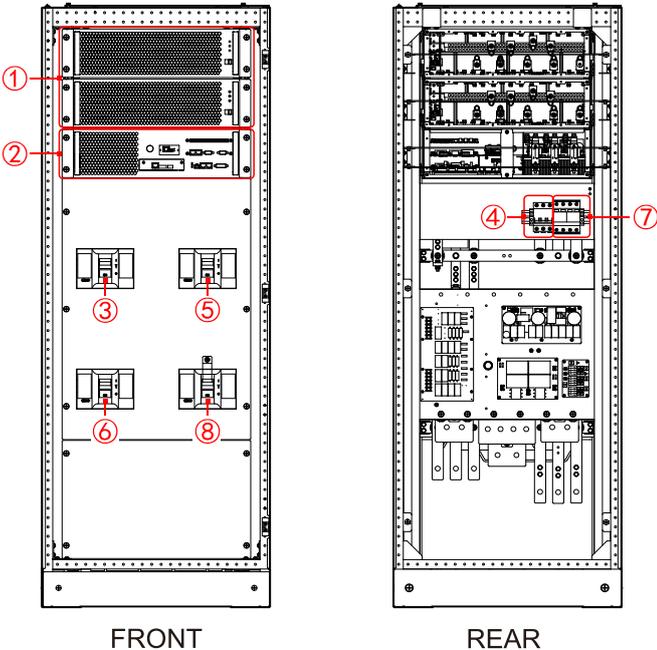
Structure layout diagram of 160K, 200K (open the door)
